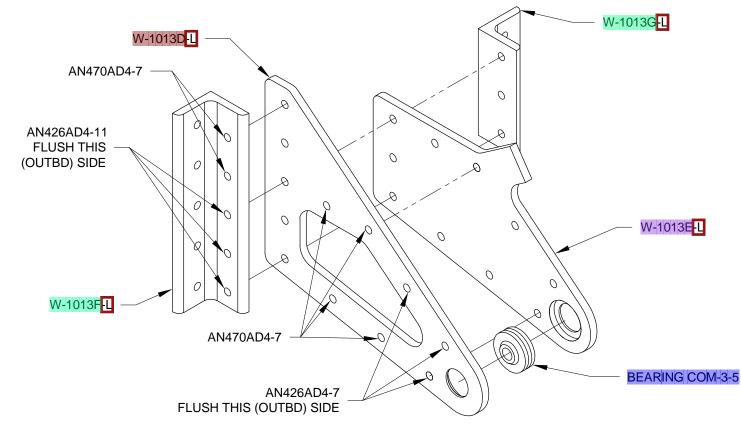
W-1013-L INBOARD AILERON BRACKET ASSEMBLY
